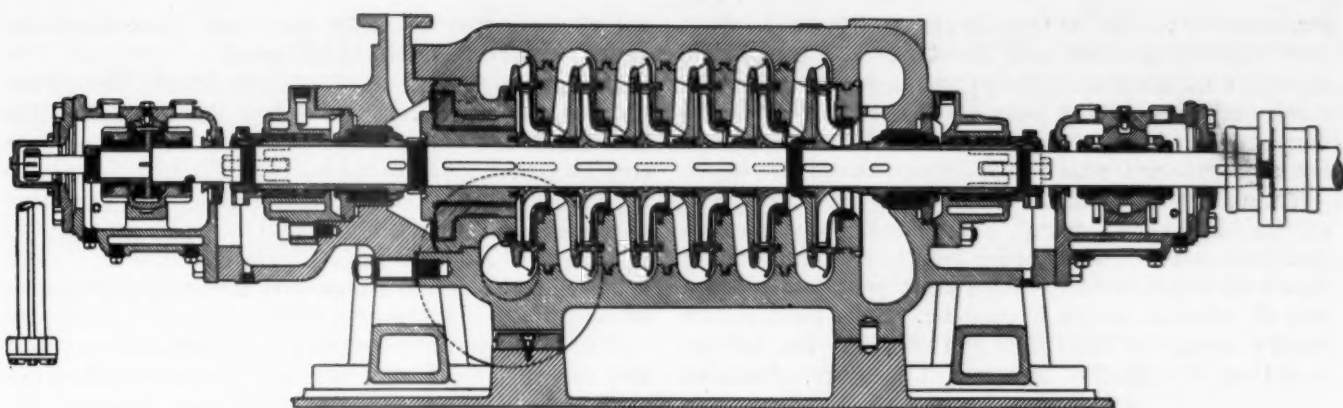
Cross-section of typical high-pressure boiler feed pump
